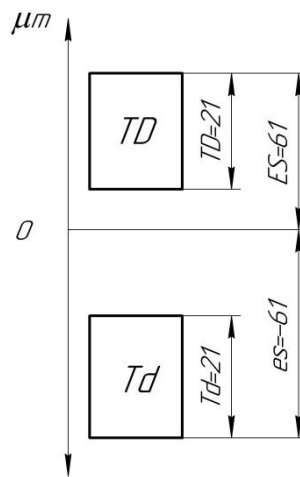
Is a simplified layout of the tolerances of the hole and shaft
